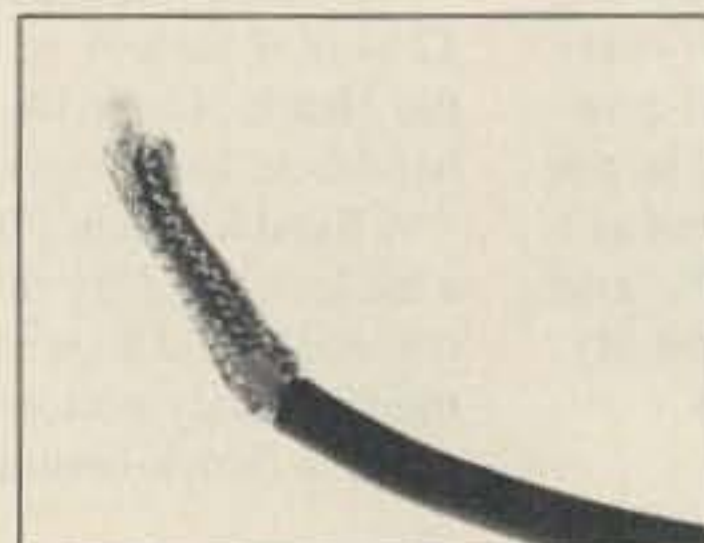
Photo D...bend the coax and work tool through the hole and pull the center insulation loop clear...
